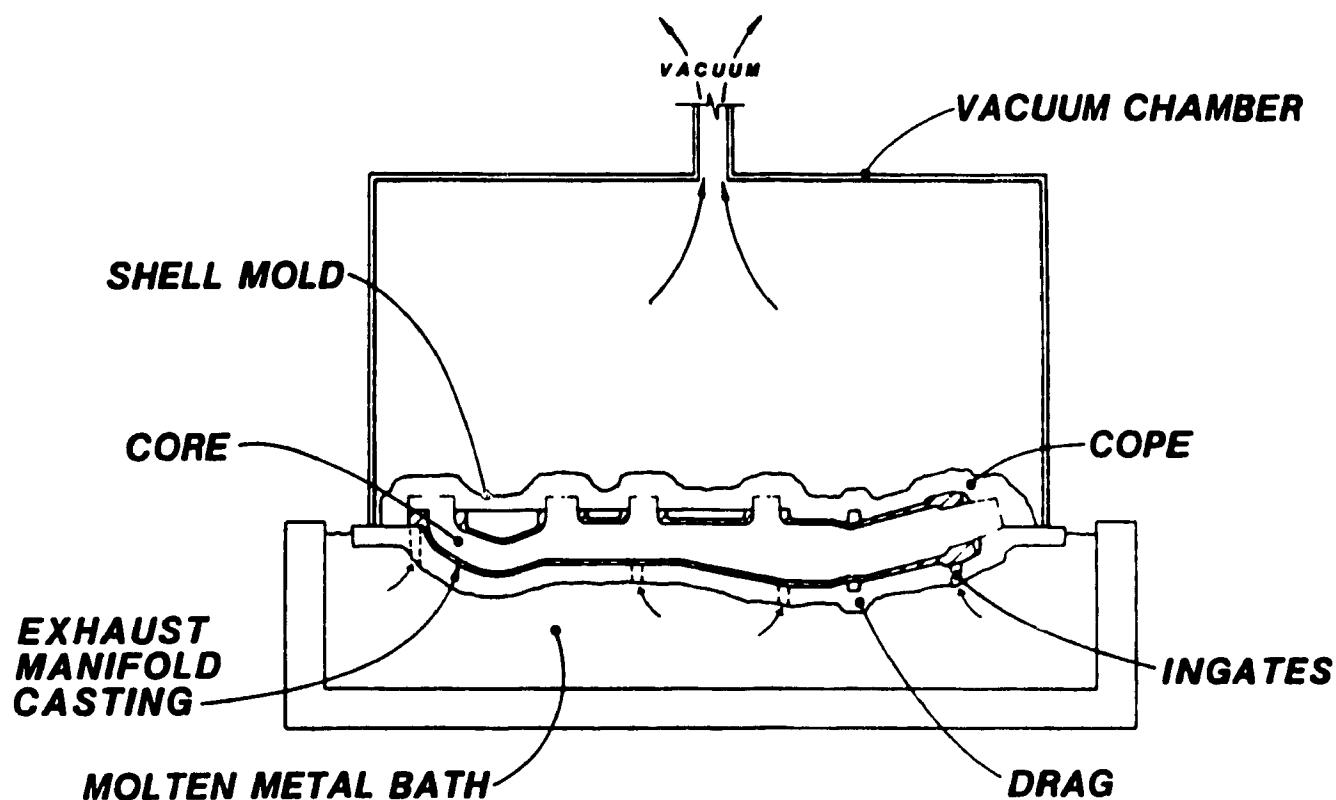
Vacuum Assisted Casting (VAC) process for nodular iron, developed by G.M. Corp. A bonded sand mold is lowered into molten iron and vacuum is applied to degas and to draw metal into the casting cavity, for a high strength, thin wall, near net shape casting [10].
